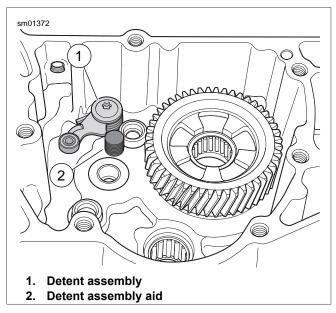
Using Gear Detent Assembly Aid (Part No. B-45520)
